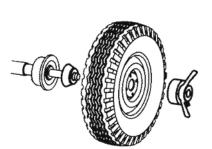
Display image of the mode "New wheel" Figure 6.2 - Wheel mounting
